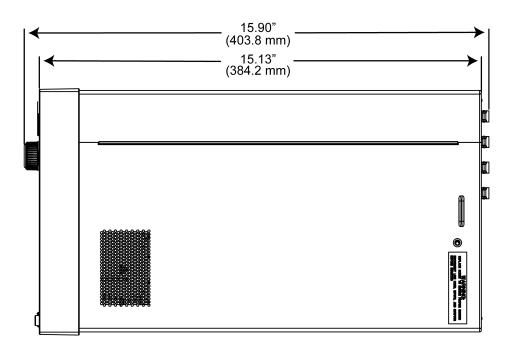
Model 2450 top and side dimensions with handle and bumpers removed
